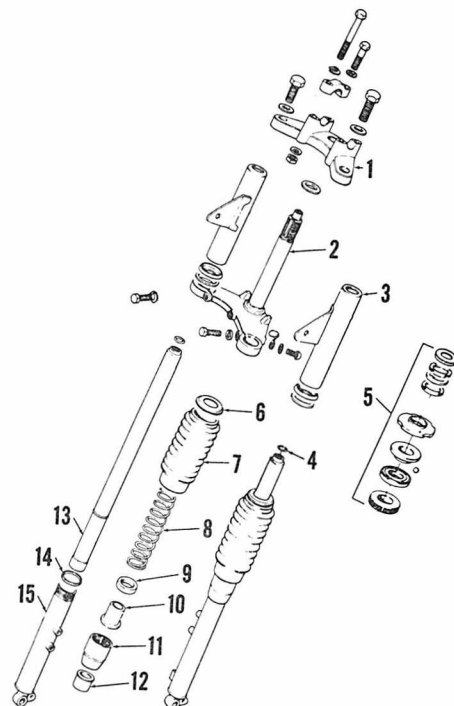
Exploded view of front suspension system used on AC 50 models. Others are similar.
